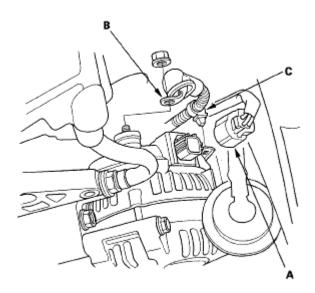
Identifying Alternator Connector, BLK Wire And Harness Clamp
